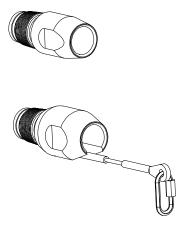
Tail Adapter (Top) & Cable Puller Assembly (Bottom)
